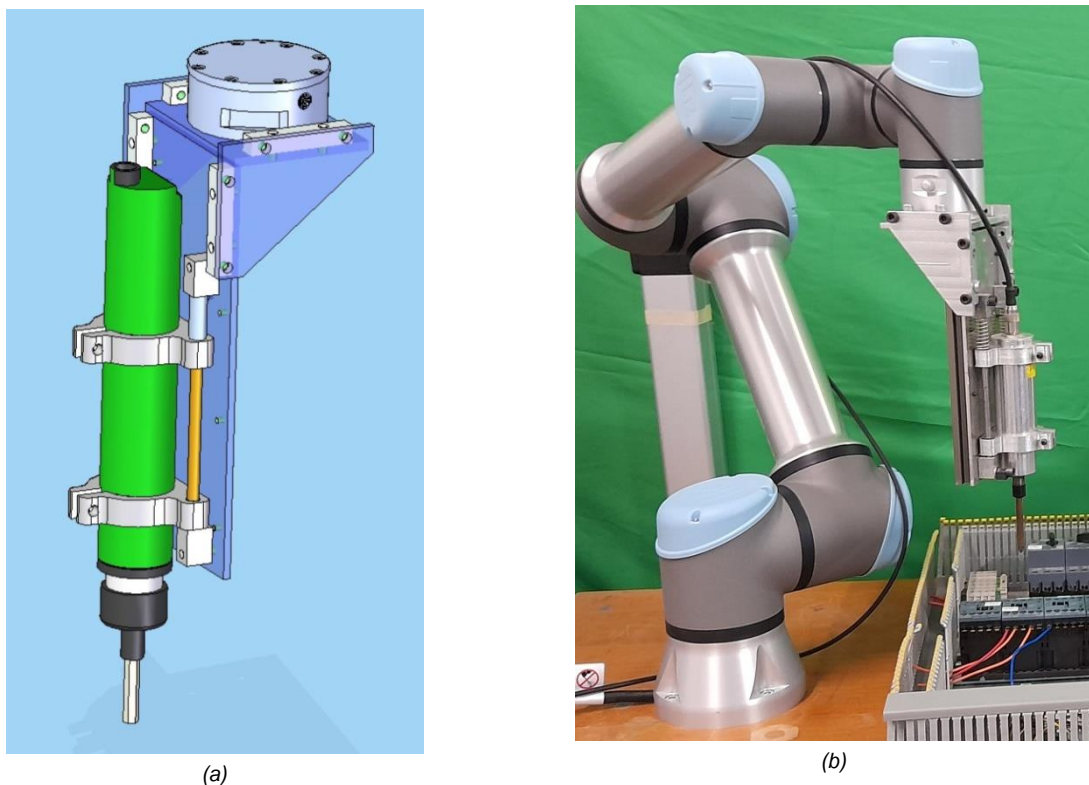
CAD model of the screwdriver with robot support (a), picture of the tool mounted on the robot (b).
